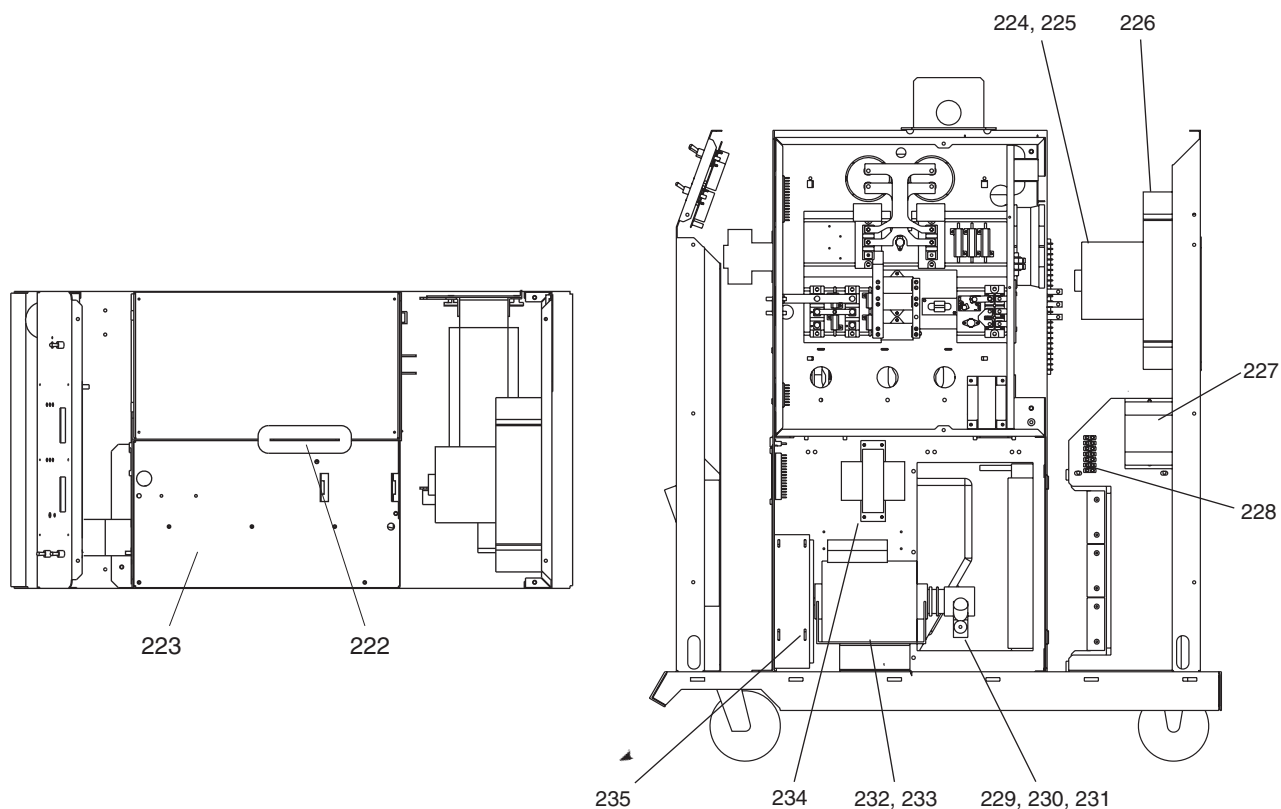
E. Power Source, Right Side, Top View (Cover Removed)
